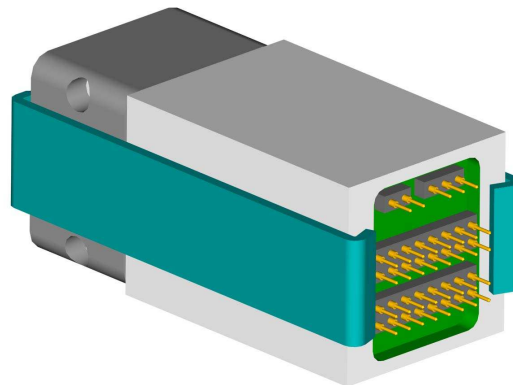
Isometric view of back of H8711 PMT assembly (without Mu shield). The pin connections for the 16 anodes and metal clip are shown.
